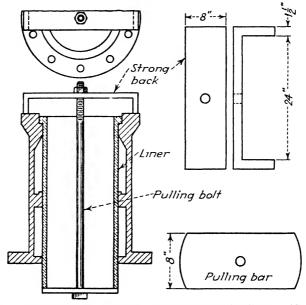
Simple pulling device for removing cylinder liners. (Courtesy of Power.)
